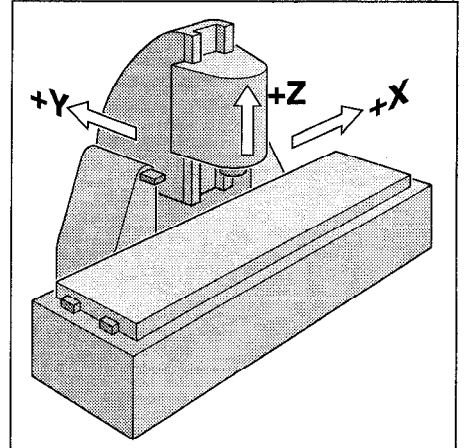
On this machine the tool moves in the Y and Z axes, and the workpiece moves in the X axis
